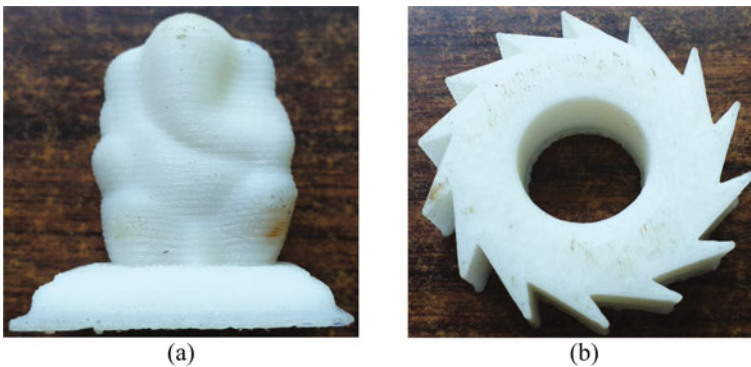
Printed parts in FDM based 3D printer: a part 1, and b part 2
